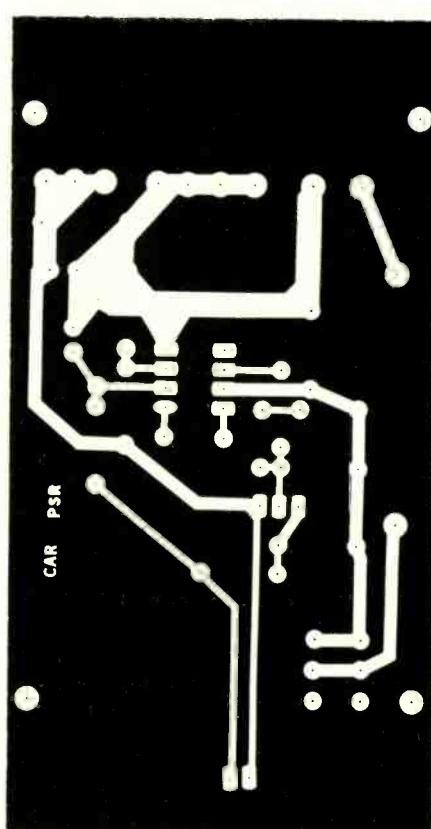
Etching and drilling guide for the dc power-supply printed-circuit board.
